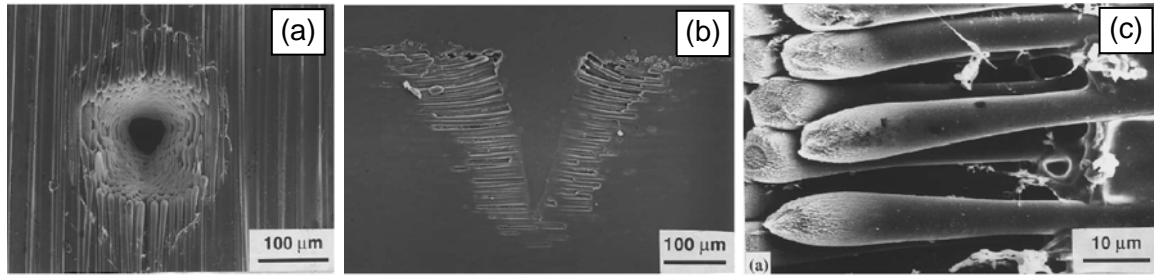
Various workpiece defects when laser drilling of CFR thermoplastic composites [119]
